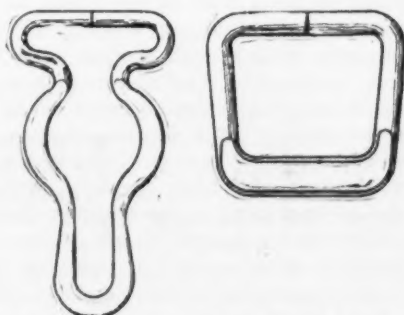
Specimens of Work Turned Out by the Baird Wire Forming and Stamping Machine.
